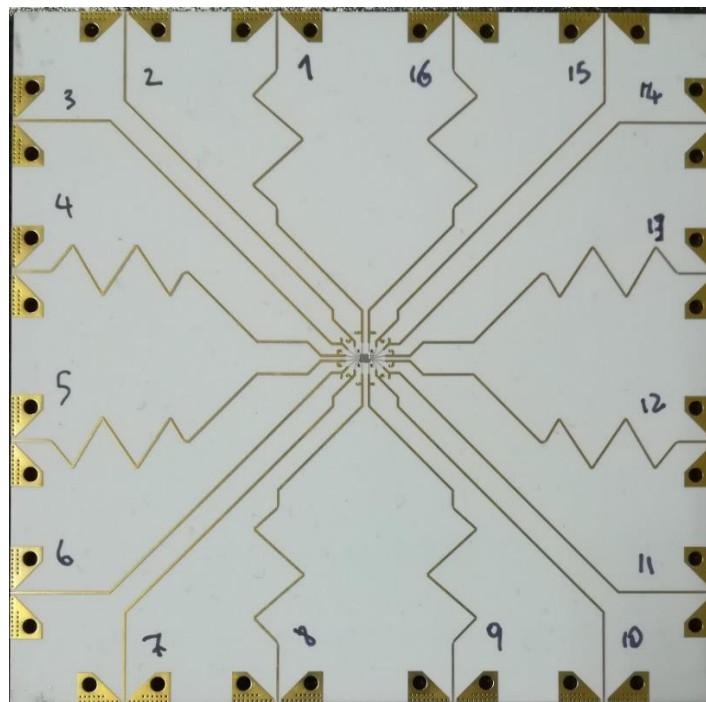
Butler matrix integrated in a PCB board by wire bonding
